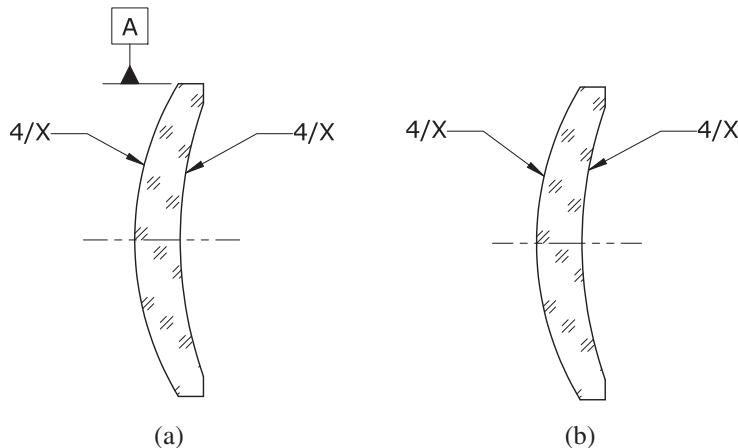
Tolerances on both optical surfaces, referencing the cylindrical surface as the datum (a) explicitly and (b) implicitly.
